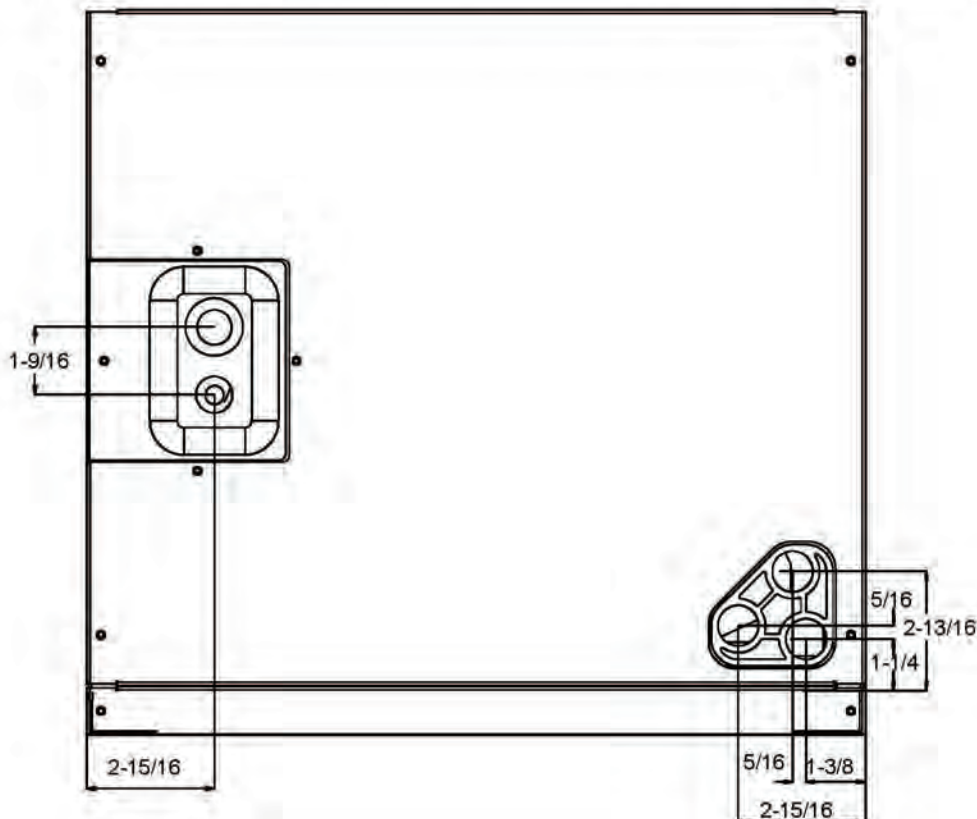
DIMENSIONS FOR FRONT CONNECT COIL
